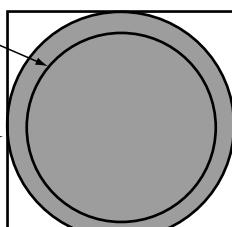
Footprint - 5 mils stencil -non solder mask defined
